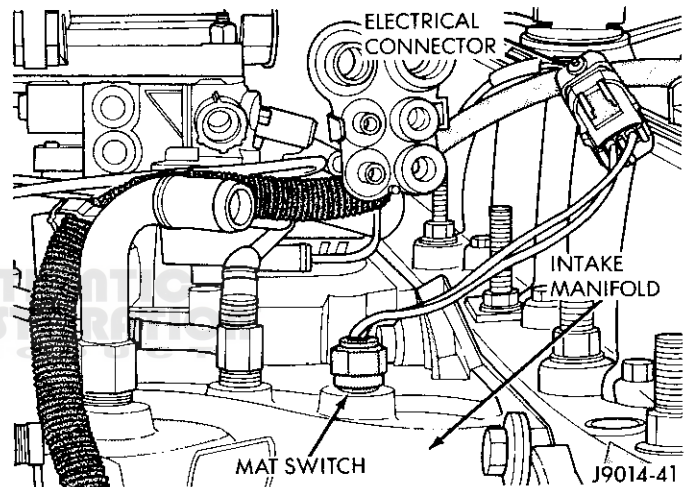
Manifold Air Temperature Sensor Removal/Installation
